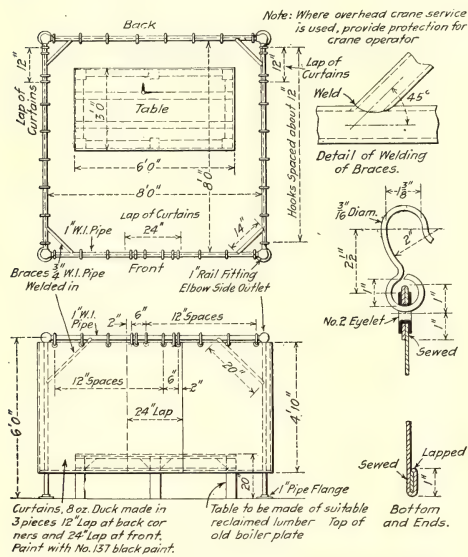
BOOTH FOR WELDING MISCELLANEOUS PARTS
